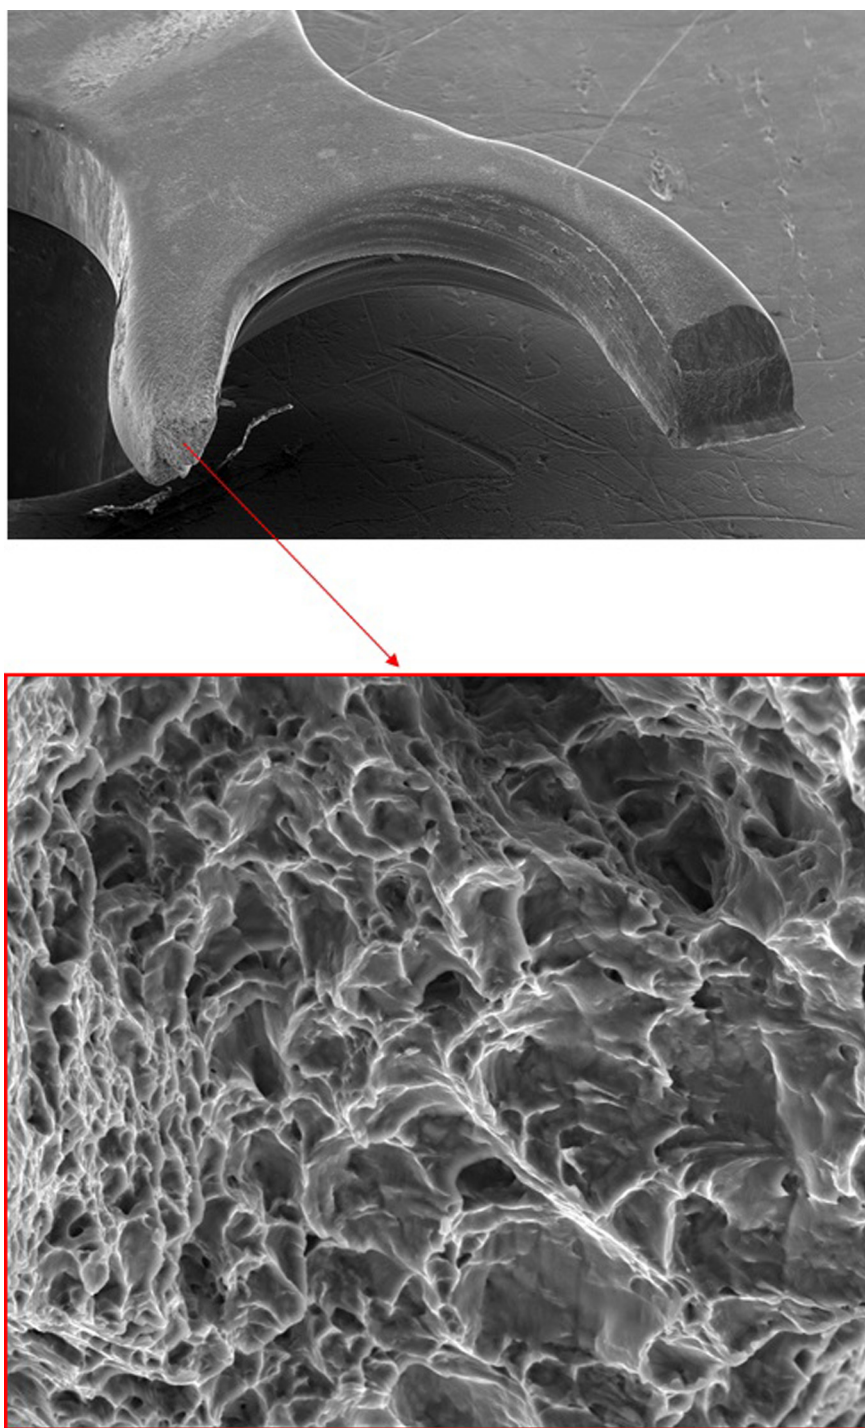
Fractographic aspects of the sample from group I with the Tóride brand. Above, Fractured plate at 60× magnification. Below, Fracture surface at 2,000× magnification.
